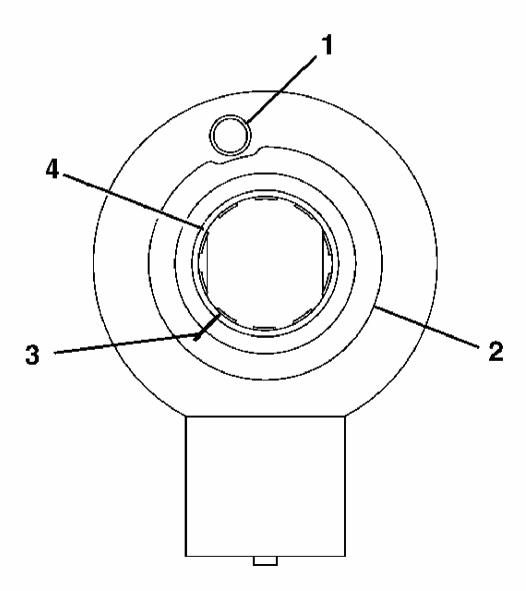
Identifying Steering Wheel Position Sensor Components Courtesy of GENERAL MOTORS CORP.
